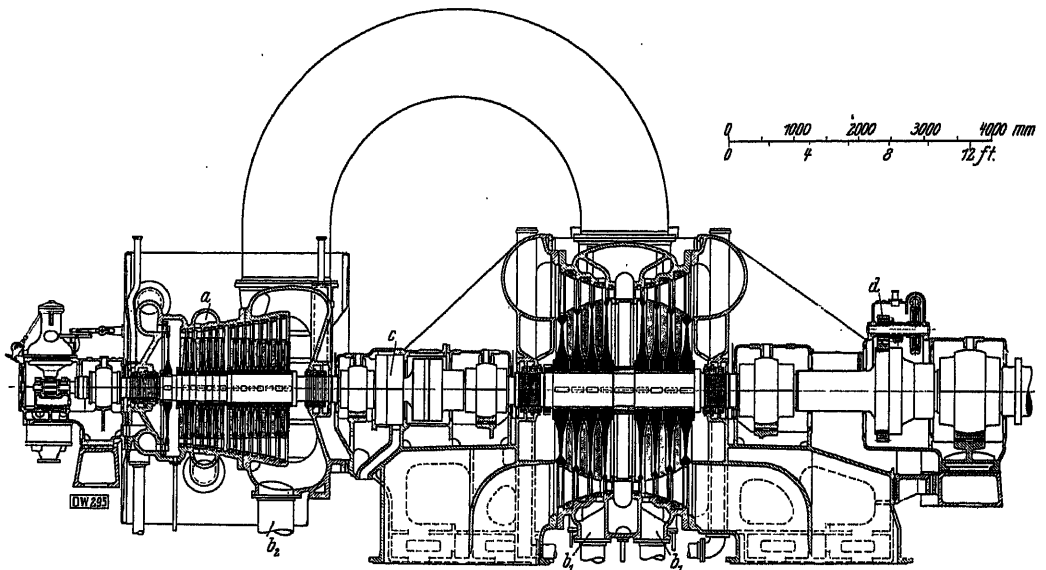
A.E.G., 85,000 kw., 1500 R.P.M., two-casing high-pressure turbine
